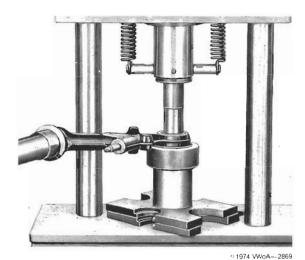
Hydraulic repair press being used to press the ball joint out of the torsion arm.
